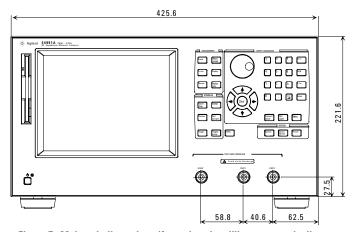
Main unit dimensions (front view, in millimeters, nominal)
